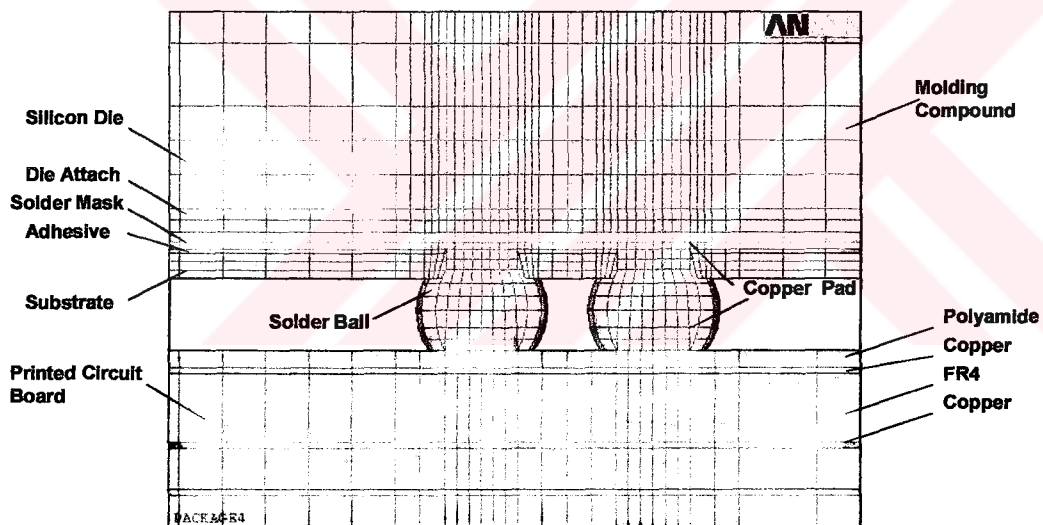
Magnified view of 96 I/O PBGA Package (Package III).
